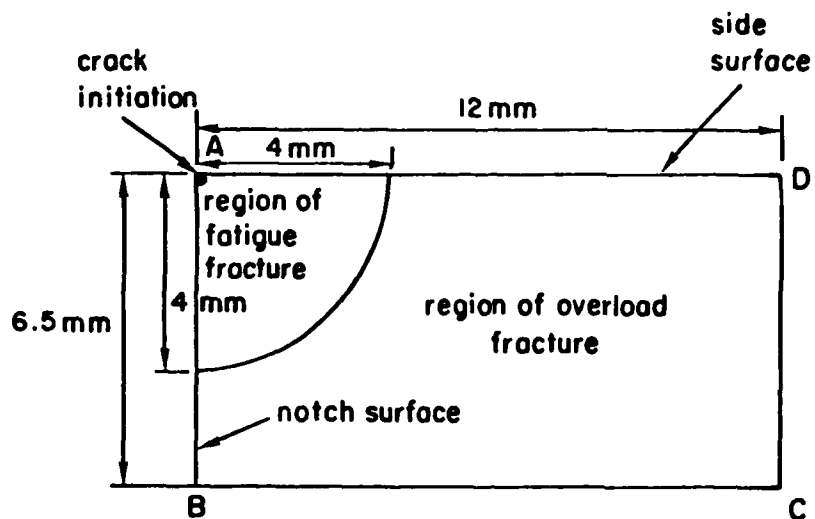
Schematic Diagram of Fracture Surface for Short-Crack Specimen.
